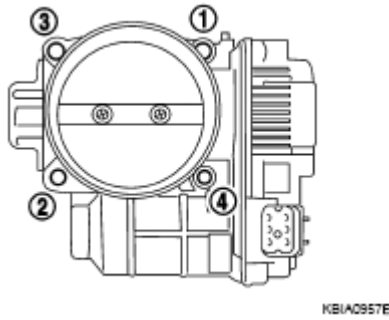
Identifying Electric Throttle Control Actuator Bolts Loosening Sequence
